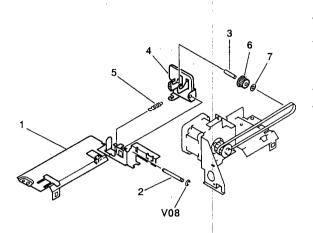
PRINTER CARRIAGE ASSEMBLY プリンタキャリッジ部
